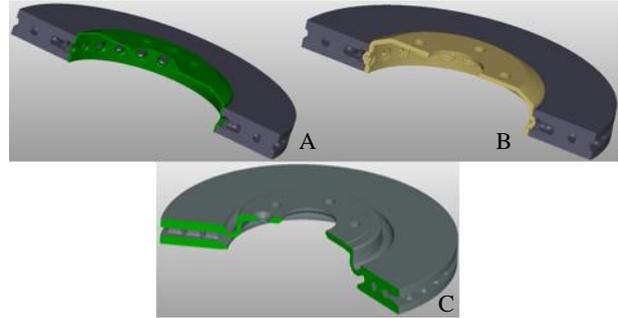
Comparison of the brake disc geometries: A plug-in with steel hub; B plug-in with aluminium hub; C conventional cast iron design
